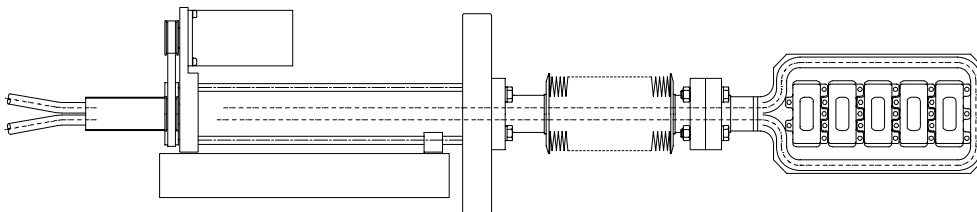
Example motorized water-cooled attenuator assembly
